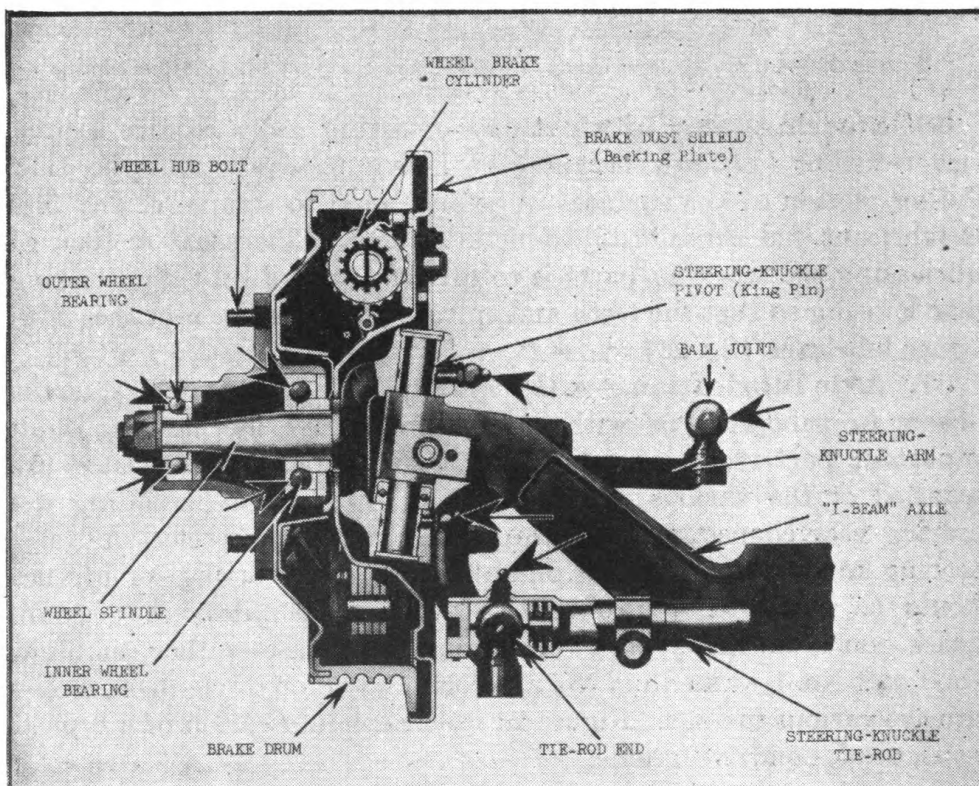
Lubrication of dead axle (heavy arrow heads show points requiring lubrication).
